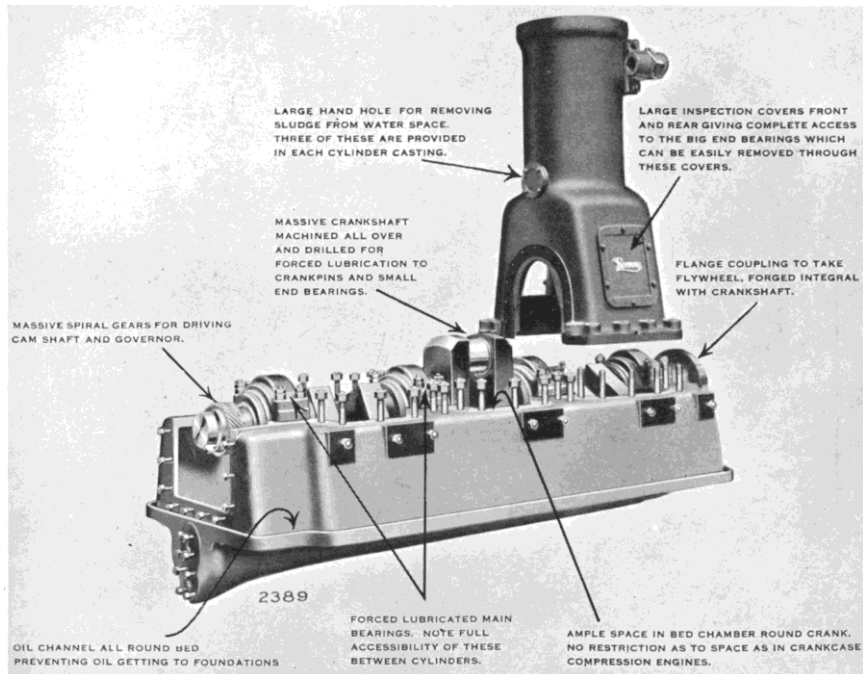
Bedplate, crankshaft and cylinder casting of a Heavy-Fuel-Oil Engine.
